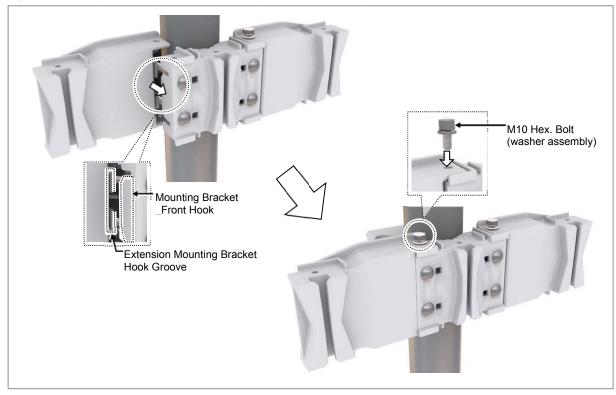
Fixing Mounting Bracket Assembly\_2 Sector Pole Type (Side Installation 2)
